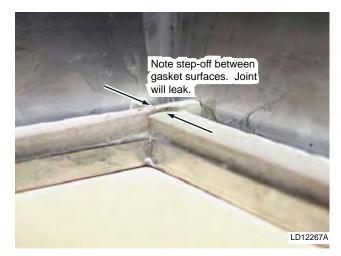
UNACCEPTABLE BUT JOINT, STEP-OFF BETWEEN GASKET SURFACES
